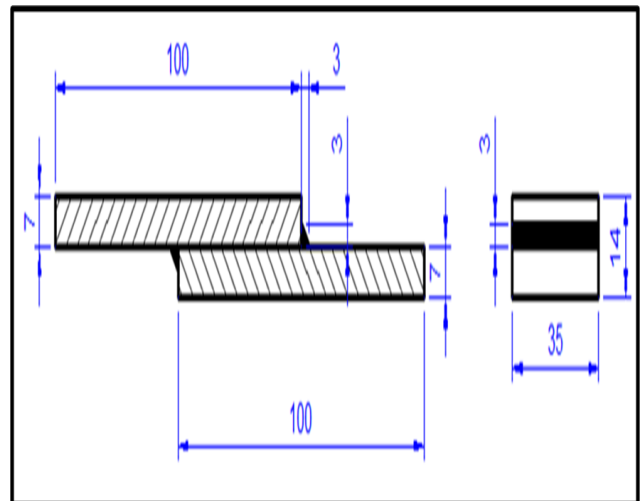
Configuration of the double fillet welds single lap joint
